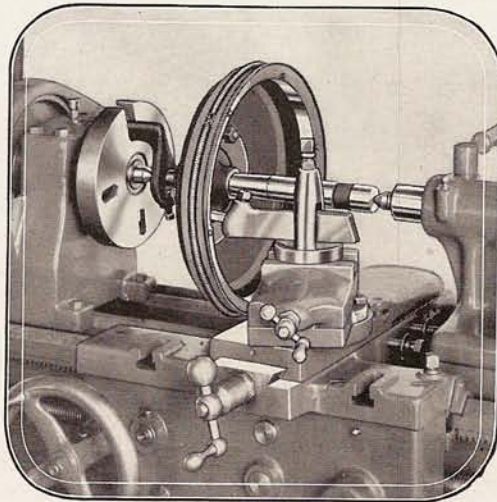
Truing a Brake Drum of Demountable Type Wheel in the 16-inch Lathe.
